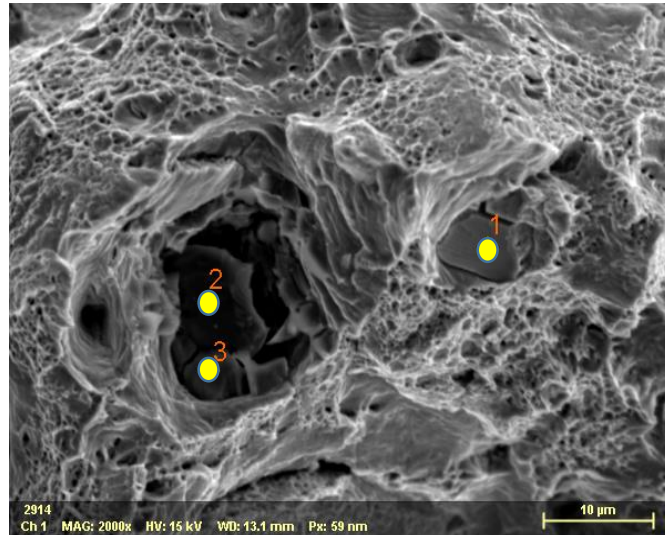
Fracture surface of specimen IN<sub>2</sub> tested at 650°C
